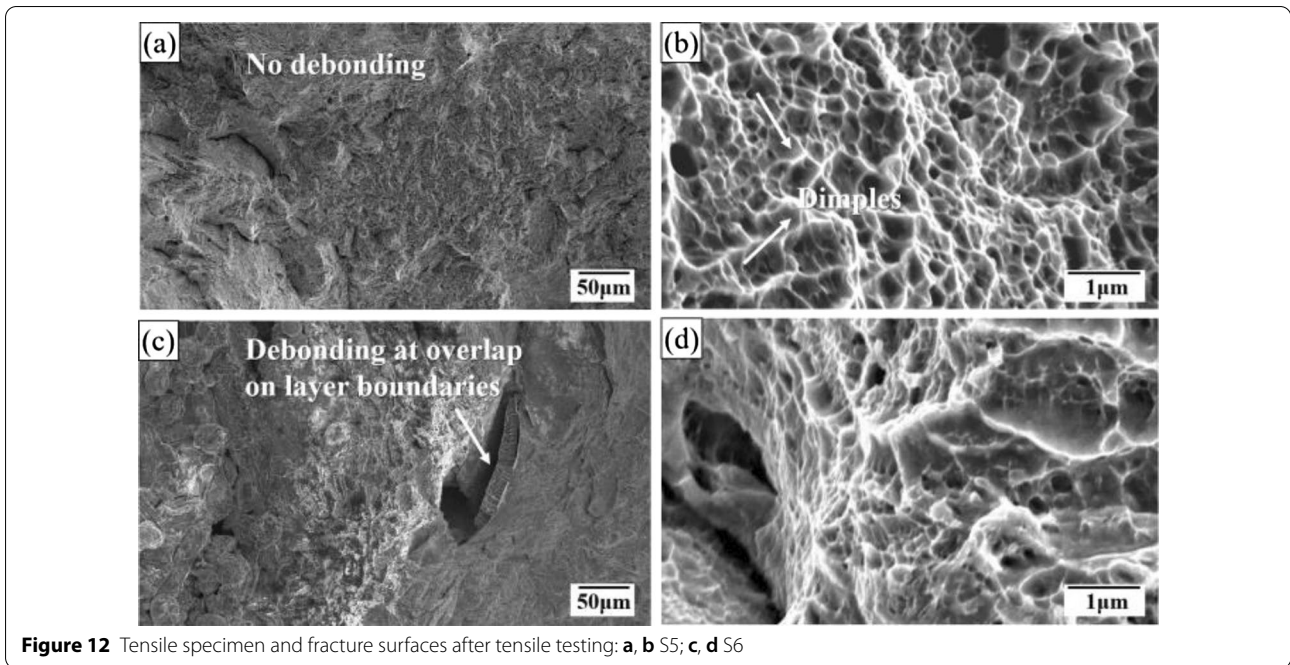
Tensile specimen and fracture surfaces after tensile testing: a, b S5; c, d S6
